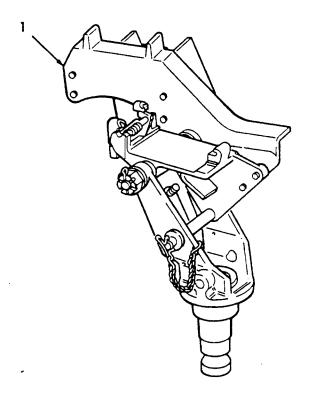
Mount, Machine Gun, M142 10900945 (Assembled View).
